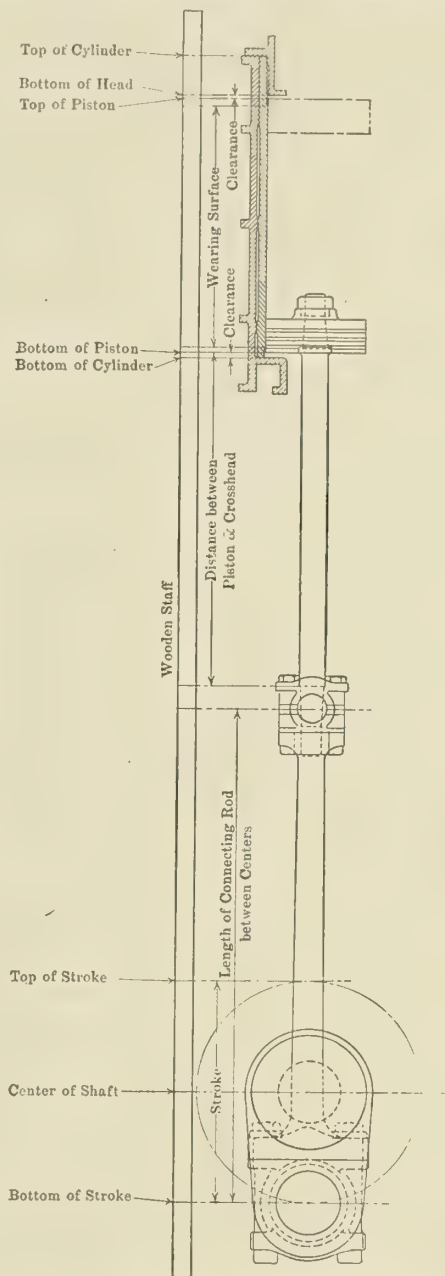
Method of Getting Exact Length for Machining Piston Rod
